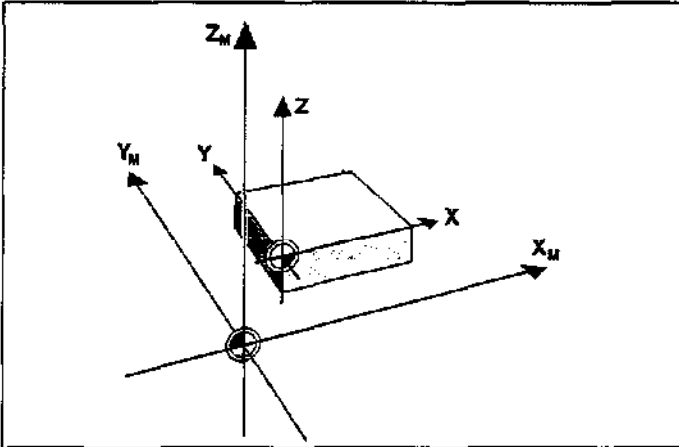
Machine datum  and workpiece datum
